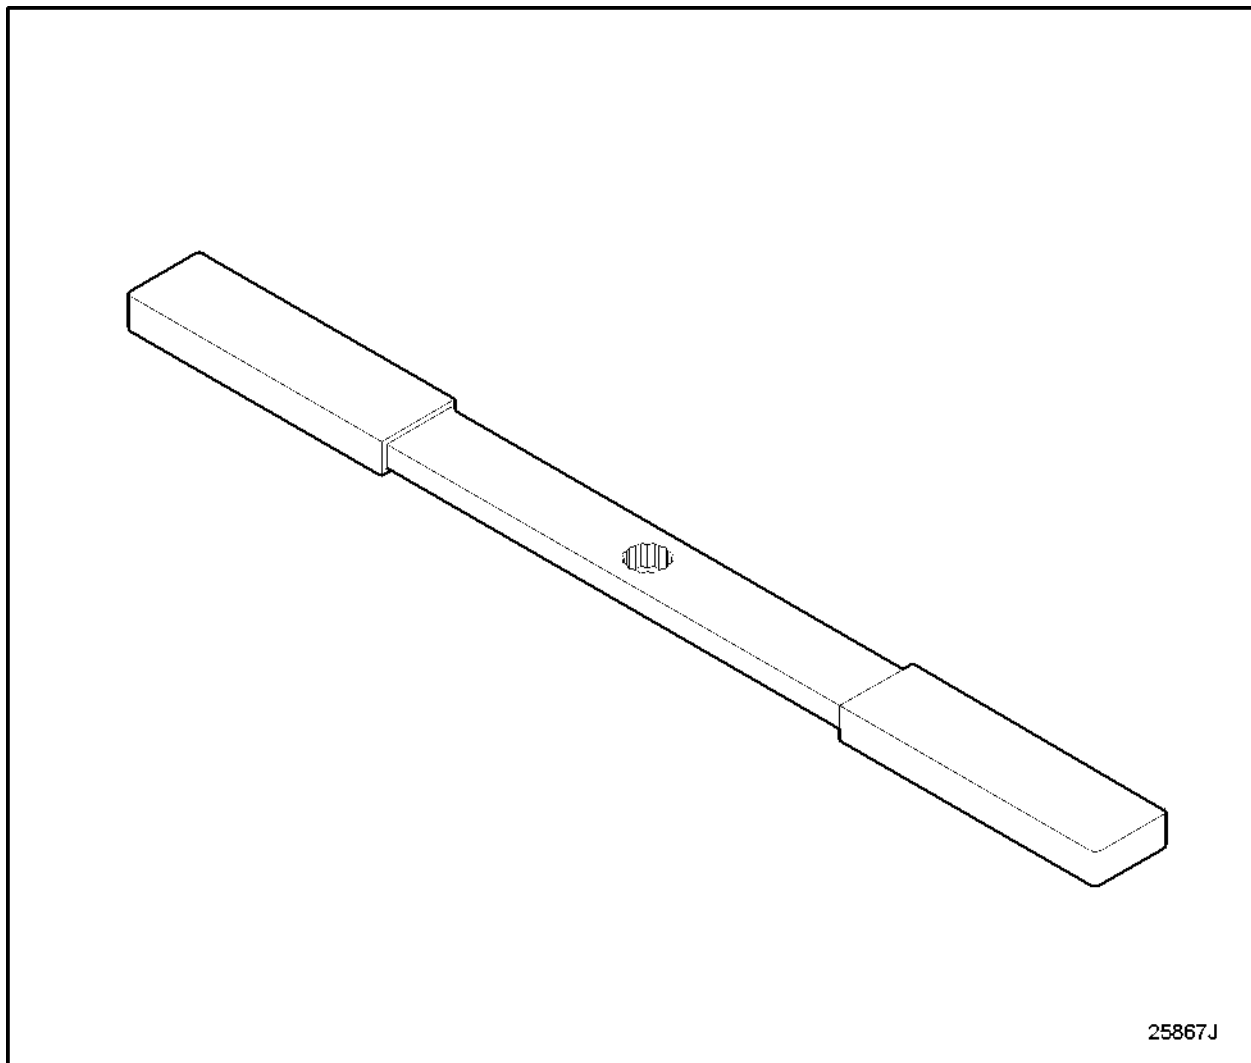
Compressor Impeller Nut Wrench,J 21223-02
